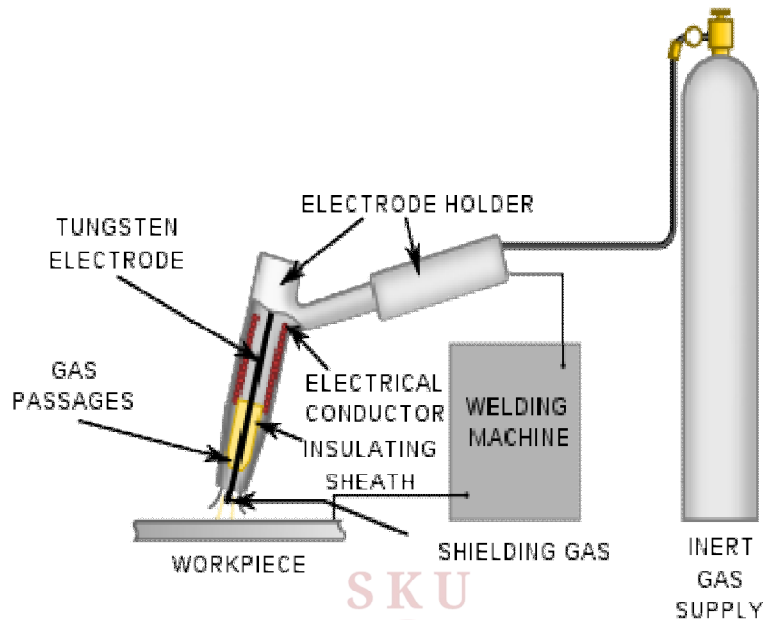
Schematic diagram of Autogenous TIG welding
